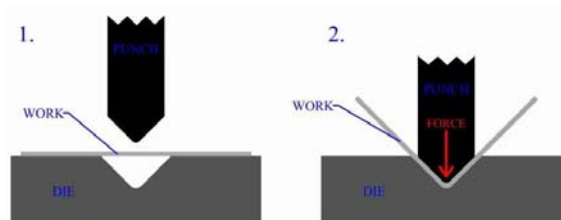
Bending Sheet on a Press-Brake; the Tool Edge Should be Radiused, Not Sharp
